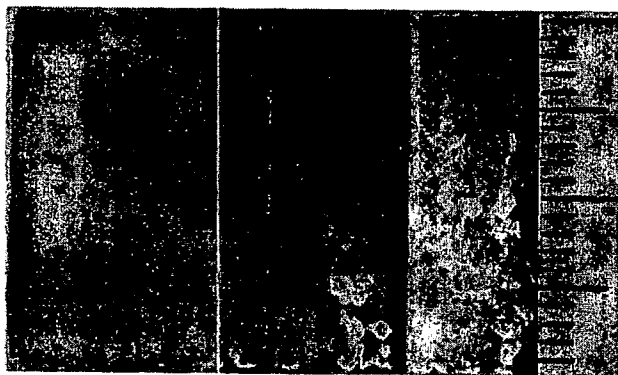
Fracture surfaces for specimens with 2, 1, 0.5 and 0.1 mm notched depth.
